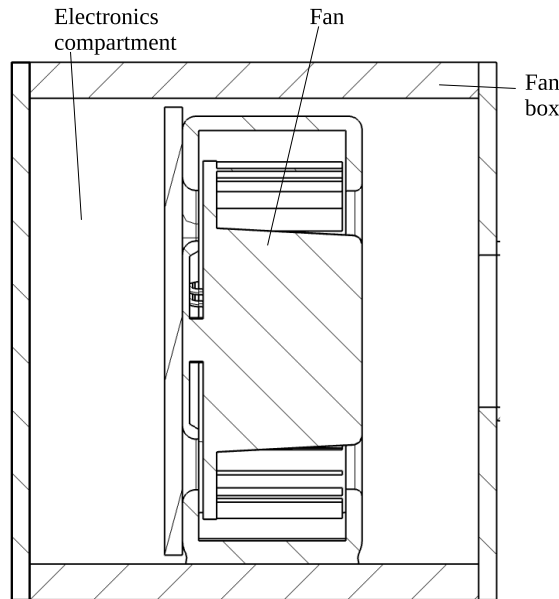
Section view of the prototype's fan box with fan and dividing wall
